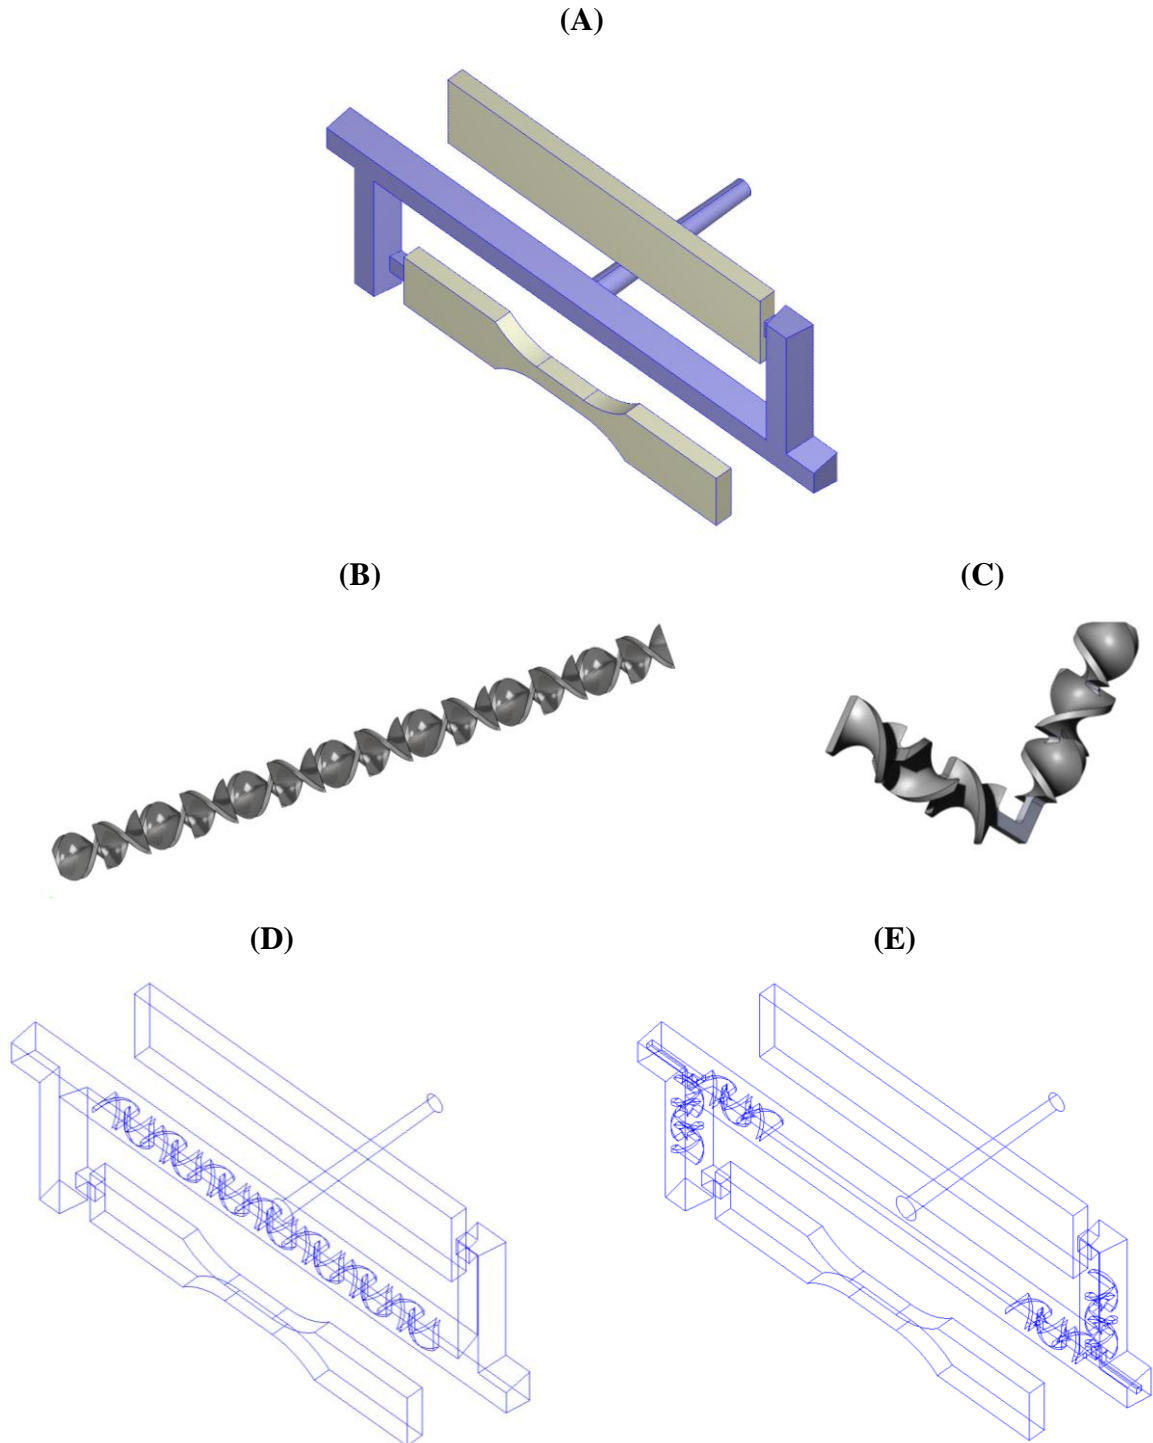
Two-cavity impact + tensile bar mold. (A) Overall mold cavity: tan geometry are the parts and blue geometry are the runners. (B) Straight helical mixer. (C) Corner helical mixer. (D) Line drawing of the straight helical mixer within the mold. (E) Line drawing of the corner helical mixer within the mold.
